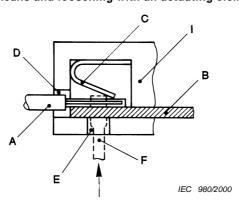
Screwless terminal with direct pressure clamping means and loosening with a tool
